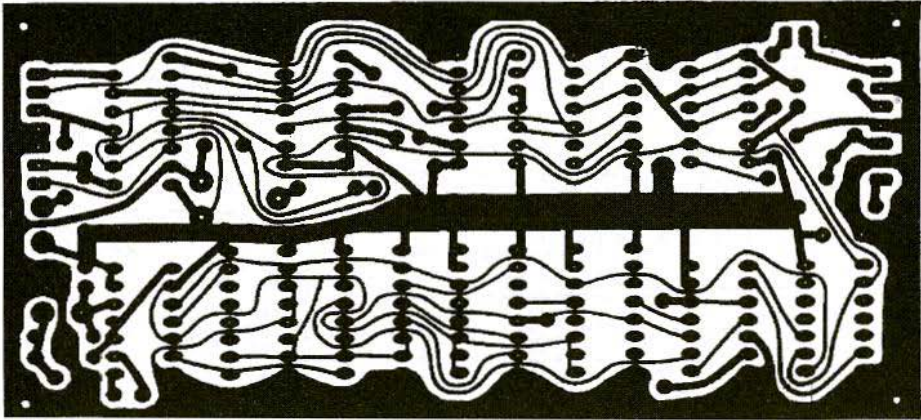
Bit-Synchroniser/Scrambler PCB - actual size 120 x 60mm
